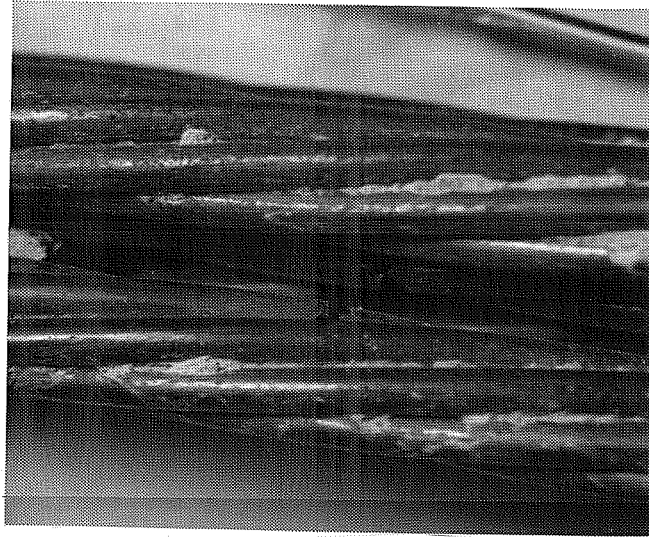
Strand - strand fretting fatigue fractures
